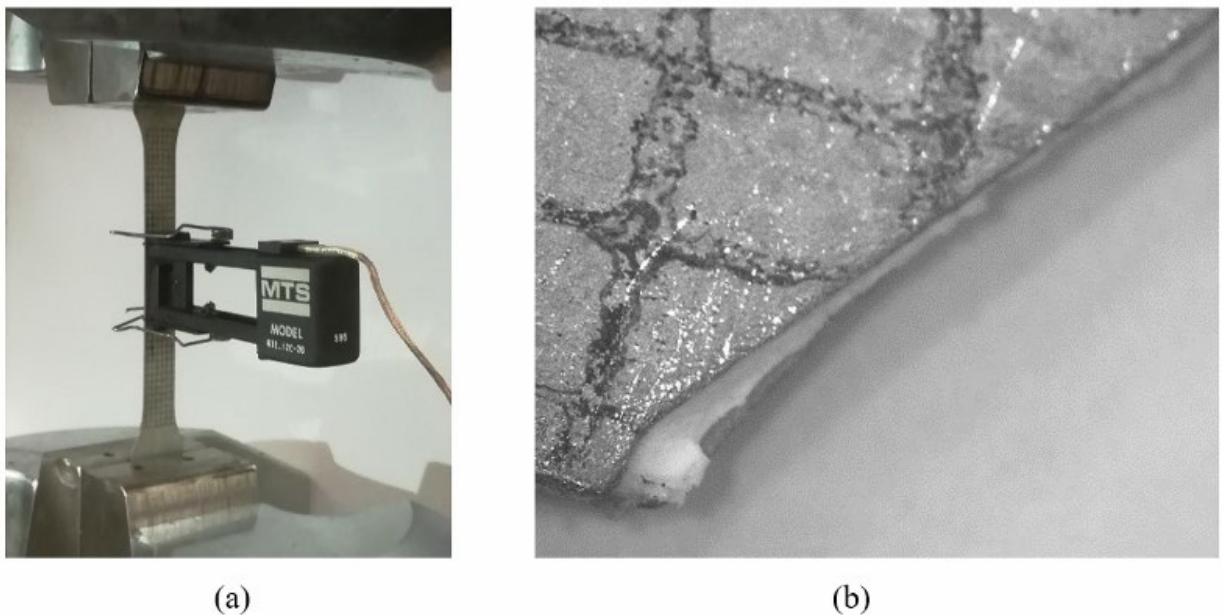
(a) Tensile sample in metal-polymer-metal composite grasped by the machine head clamps and (b) typical fracture surface of a tensile sample.
